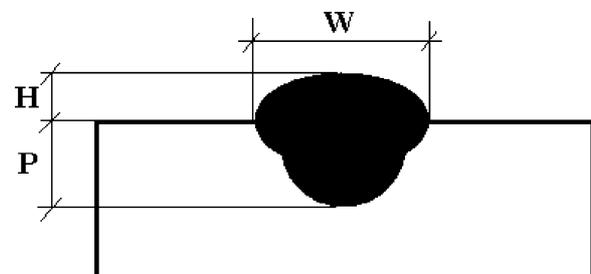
A schematic representation of weld bead geometry parameters (W : width, H : height, P : penetration).
